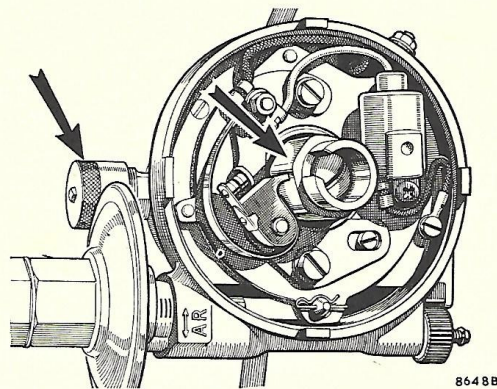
The distributor greasing points. The arrows indicate the drive shaft greaser and the cam.
